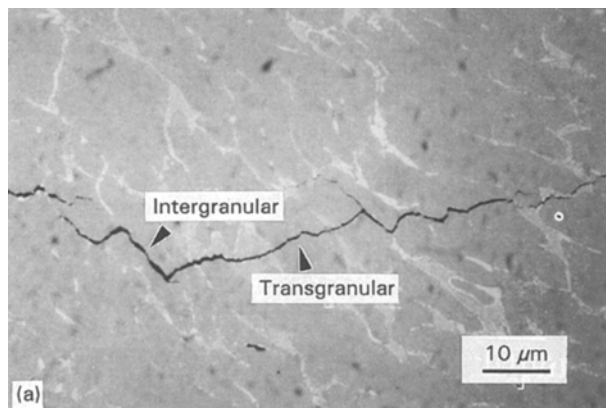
Microstructure showing crack path, and (b) fracture surface of extruded Ni-43 Al-9.7 Cr alloy, compression tested at 300 K, showing mixed mode (trans and intergranular) fracture.
